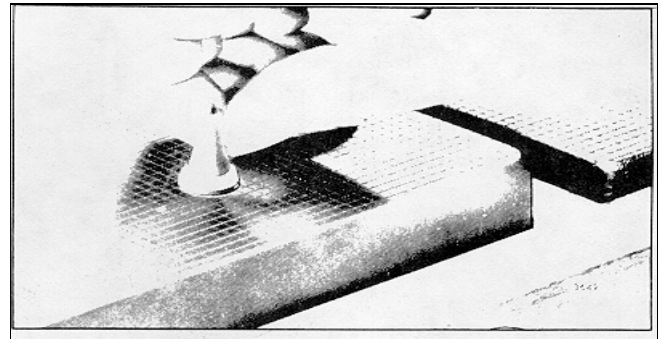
Lapping Spray Tip on Lapping Blocks J 22090
